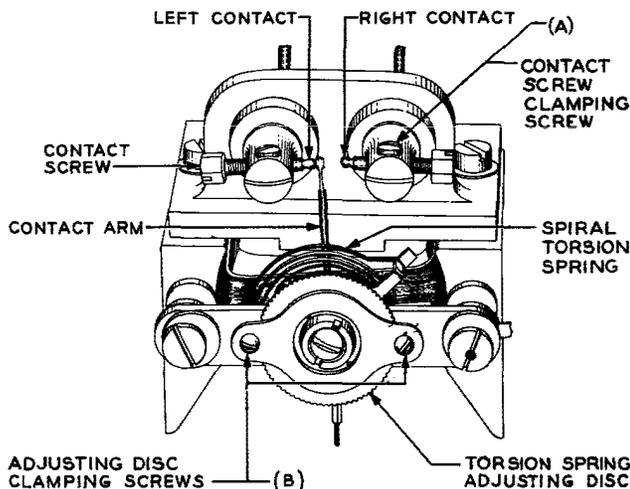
Contact Assembly — Weston Models (earlier relays having contact screw clamping screws)
